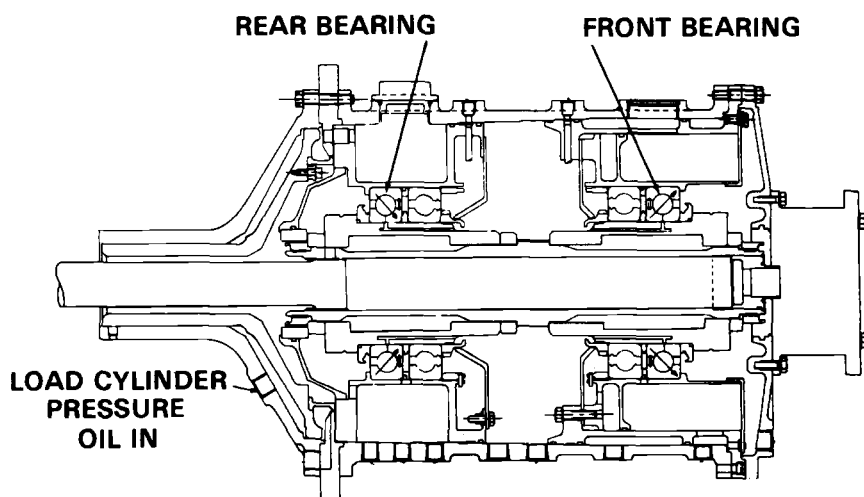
The thrust bearing test rig, which permits the simultaneous testing of two bearings under identical conditions.
